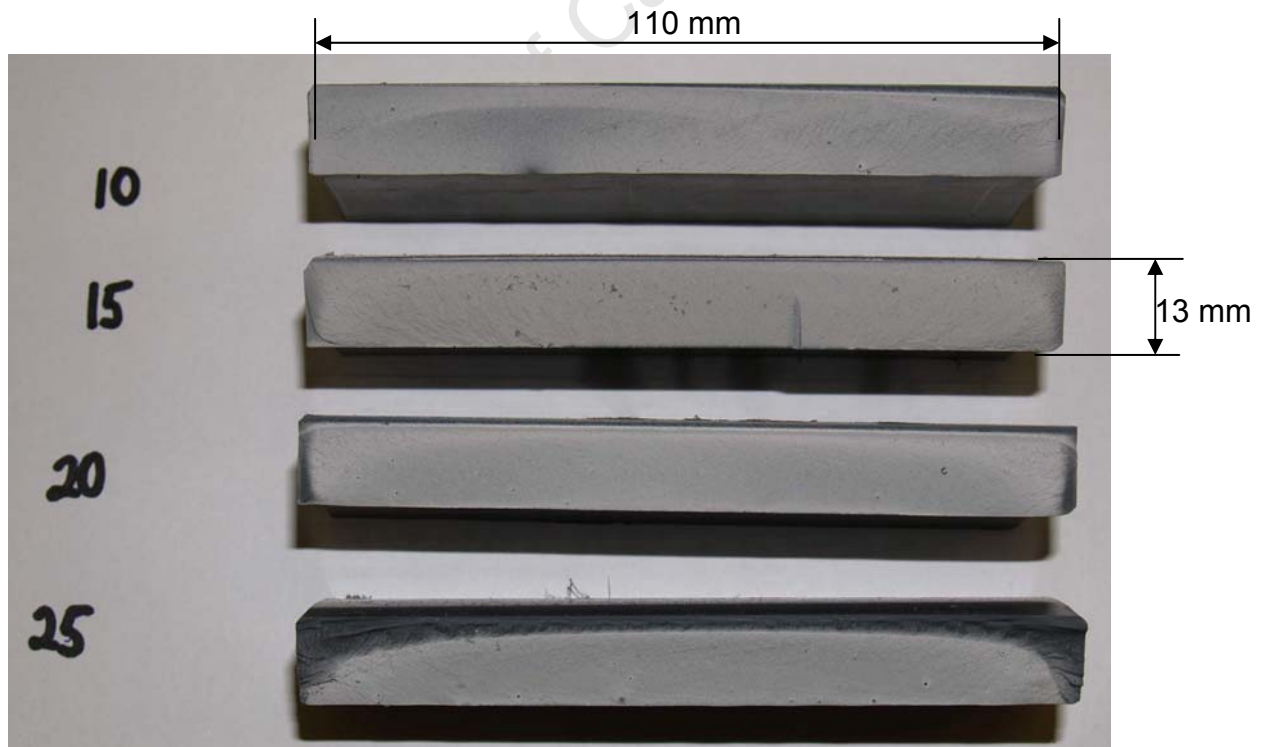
Fracture surfaces for 10 – 25 MPa and 20°C
